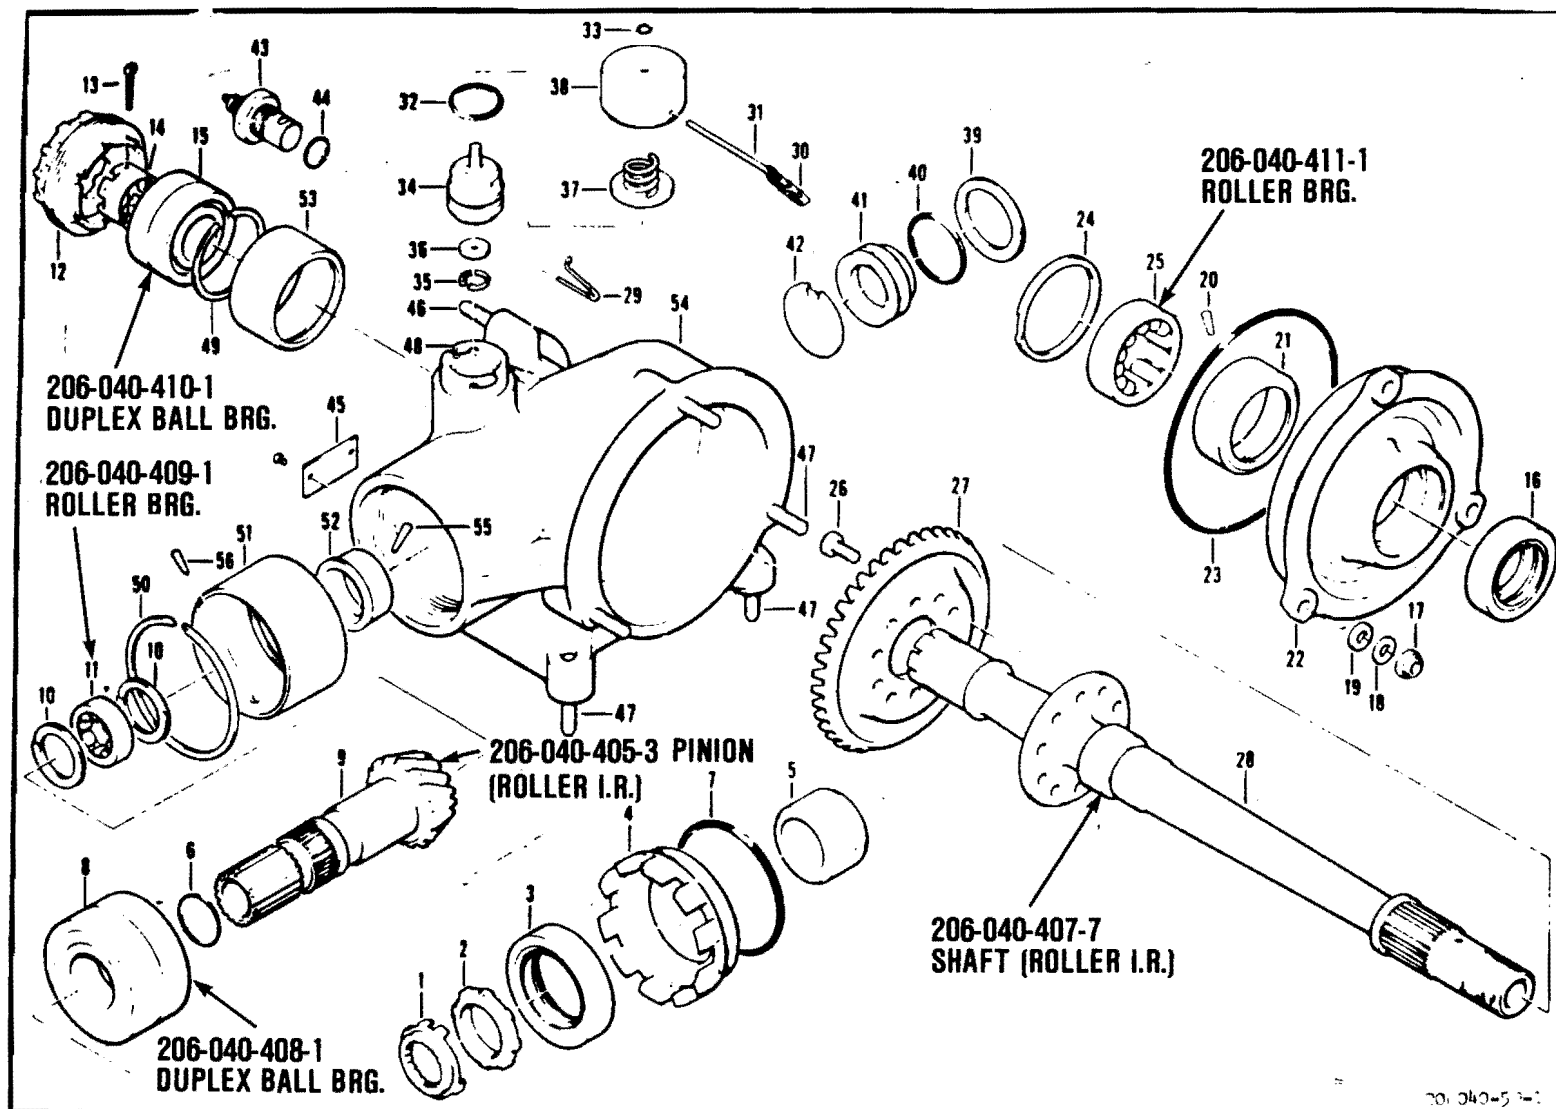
Tail Rotor Gearbox, OH-58 A/C
